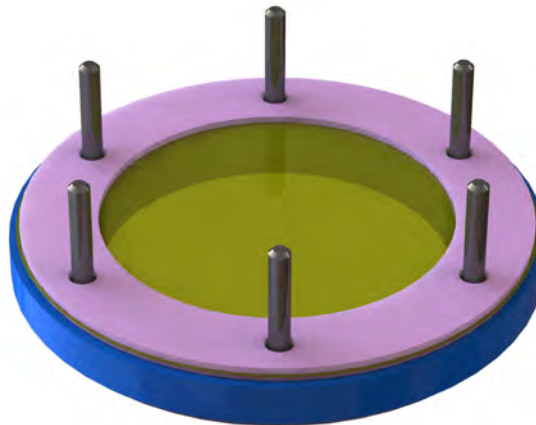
Flange (face-to-bottom) to mount gaskets and membranes layer by layer.
